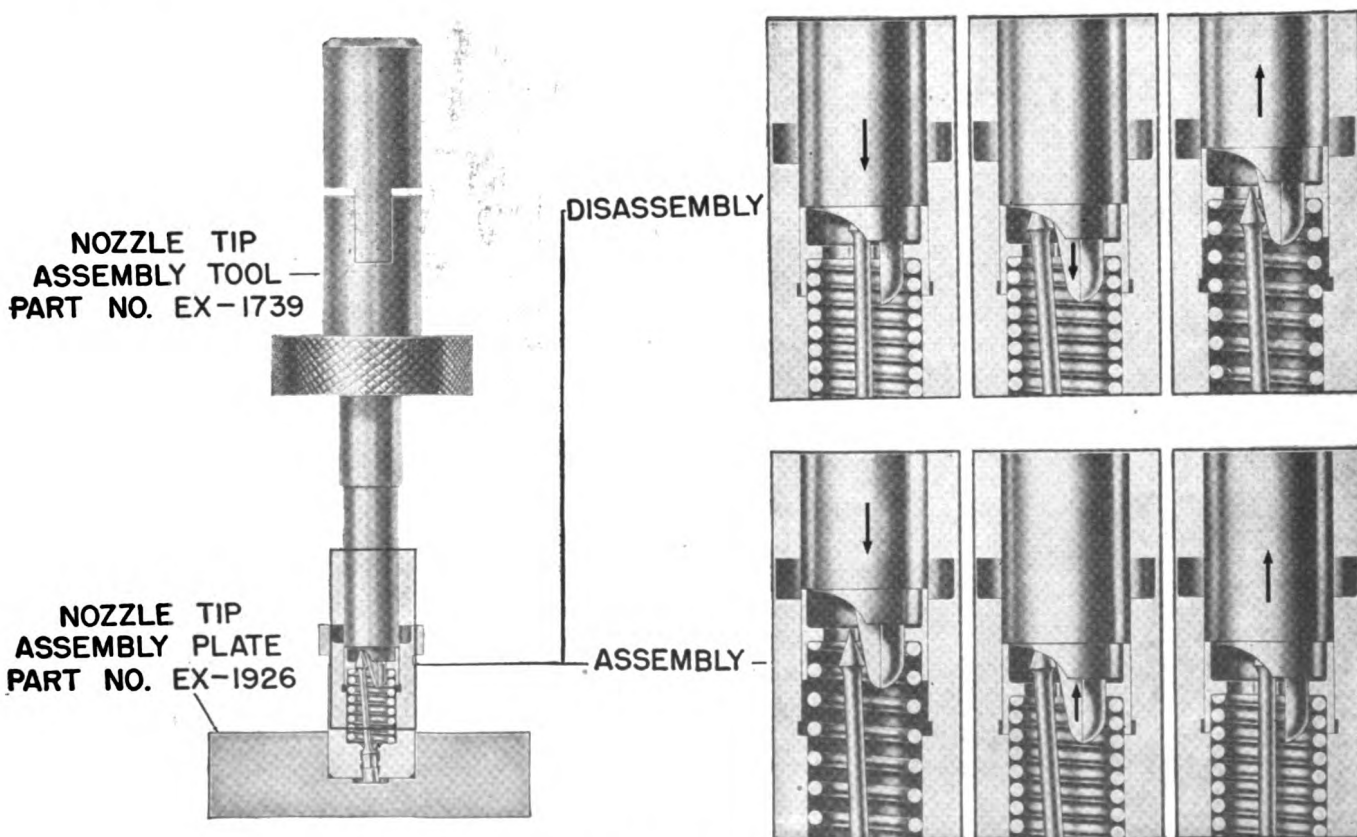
Use of special tools to assemble and disassemble nozzle.
